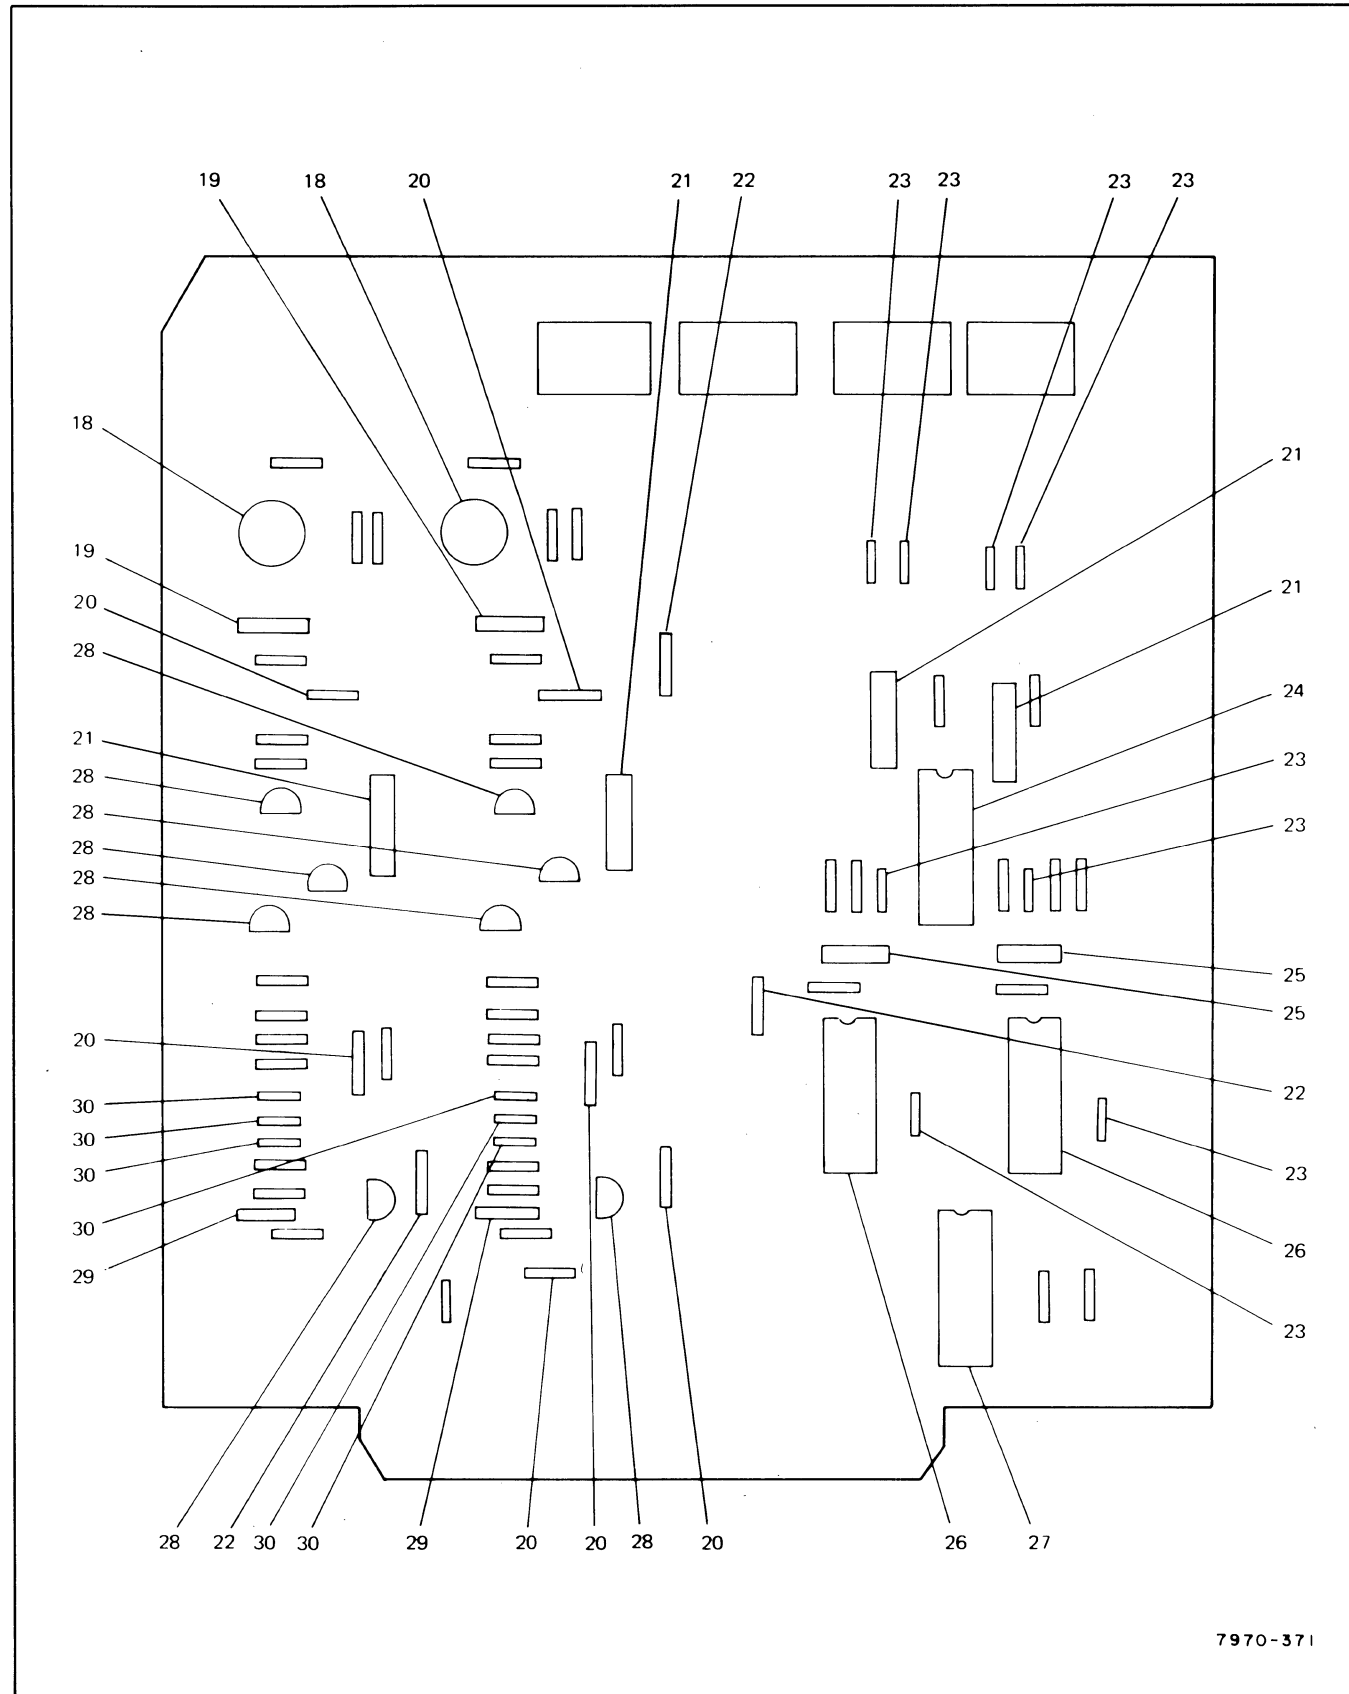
Dual-Channel Read Data Assembly (10 - 20.9 ips), Parts Location Diagram (Sheet 2 of 2)
